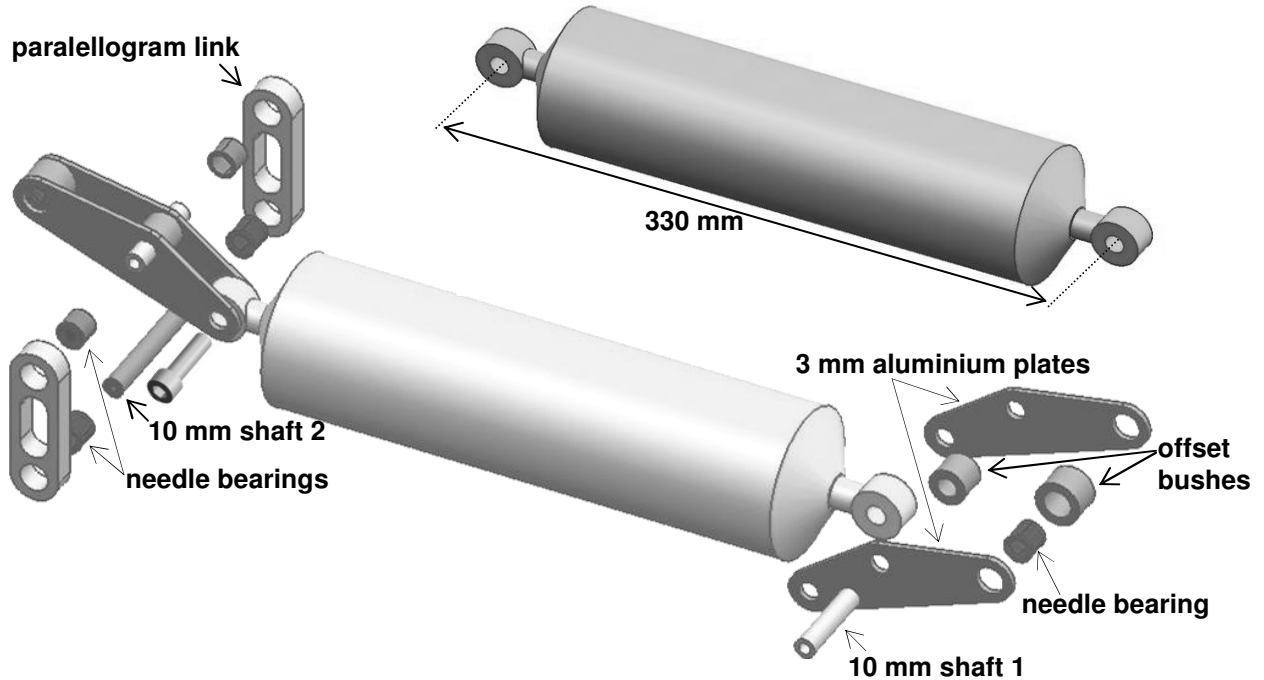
Exploded view of triangular plates, bearings and parallelogram links
